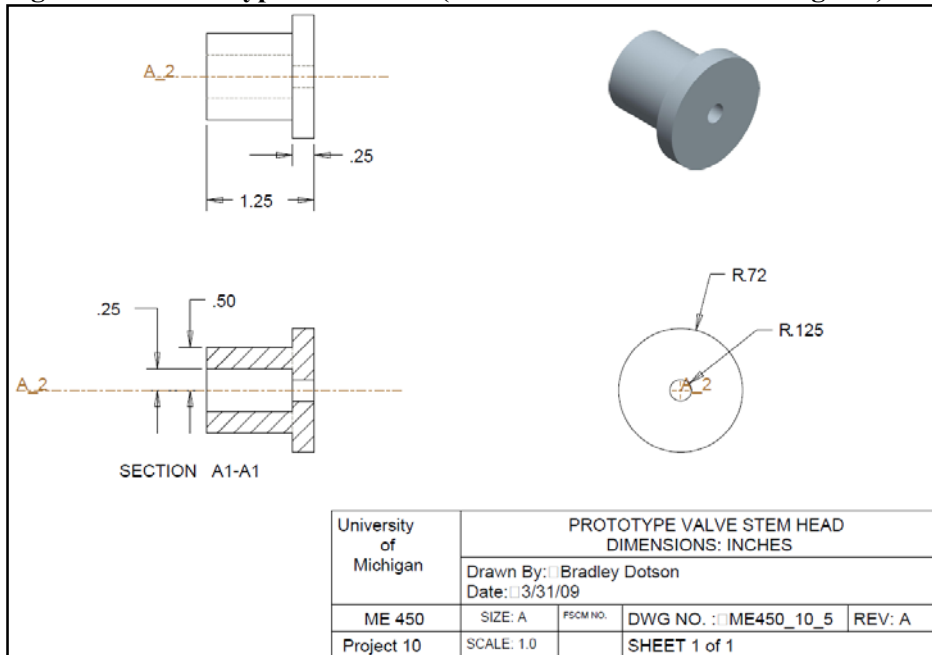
Prototype Stem Head (Dimensions in Inches and Degrees)
